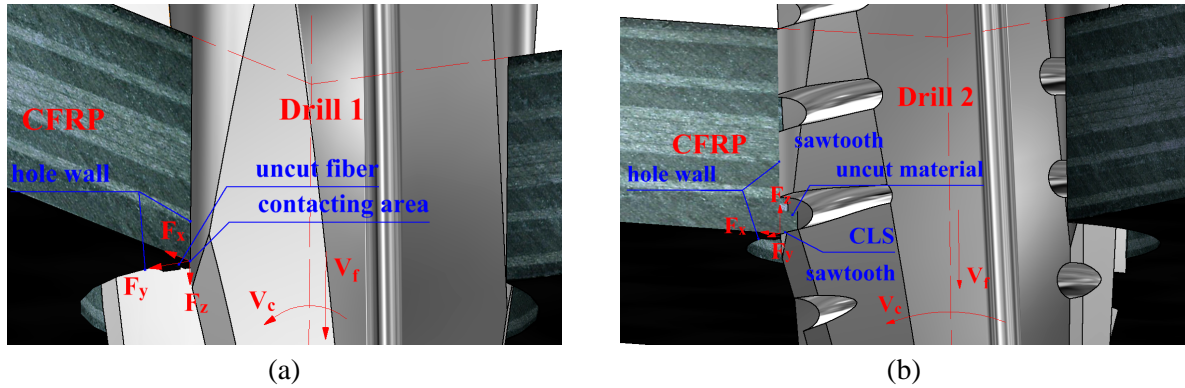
Geometrical analysis of cutting in Stage IV (a) one shot drill , (b) one shot drill with intermittent-sawtooth structure
